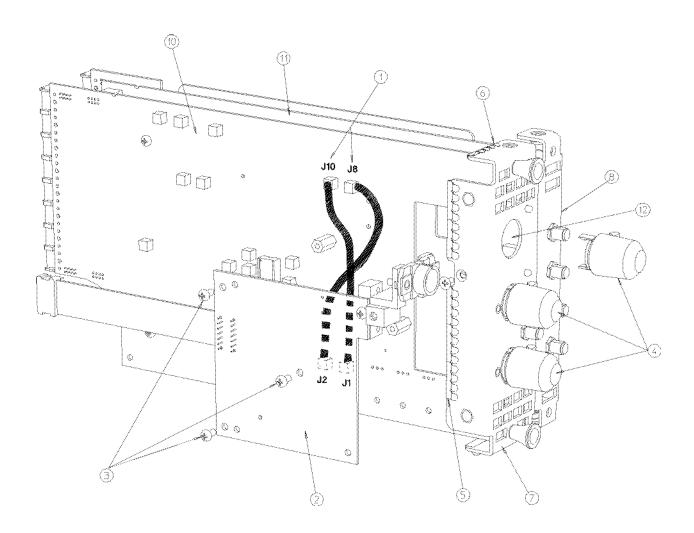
Options UKT/USN STM 1/4 Optical Module - Exploded View
